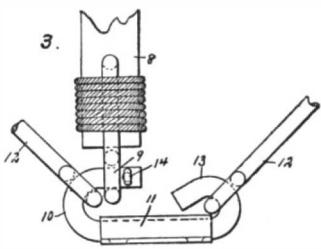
Joint Used in Connecting Uprights to Planes.
